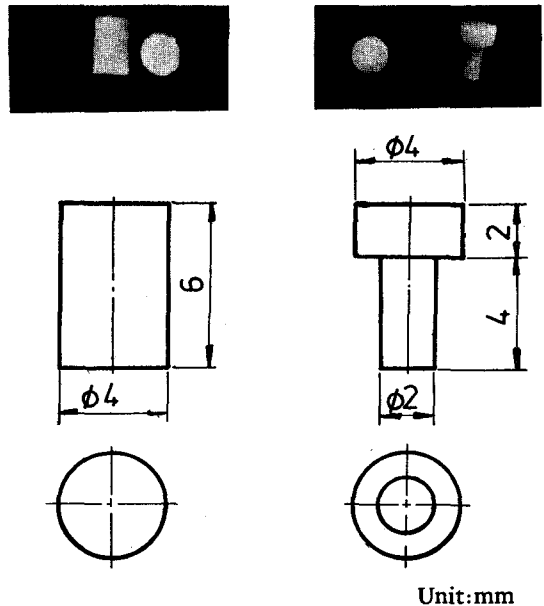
Mold for manufacturing a specimen (Test for compressive and fatigue strength).
